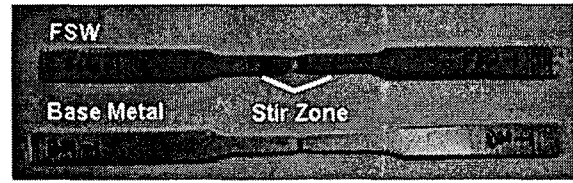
Tensile properties of FSW weld in 304 steel and fractured tensile specimens of FSW weld in 304 steel and the base metal
